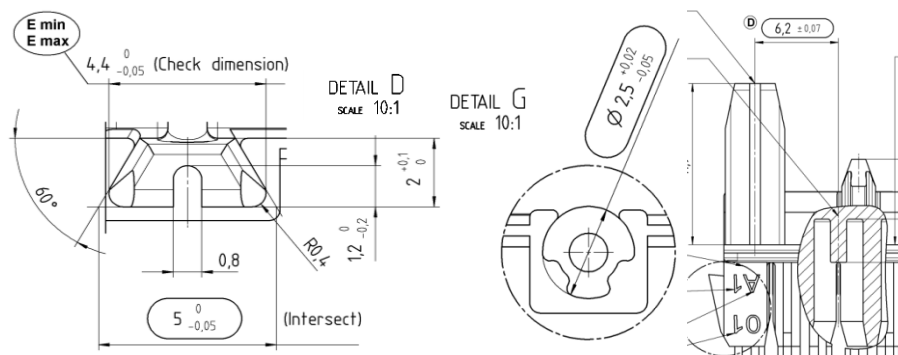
Inspected dimension on “terminal box” molding (left) and dimensions where the anchor plane is not applicable [source: own study]
